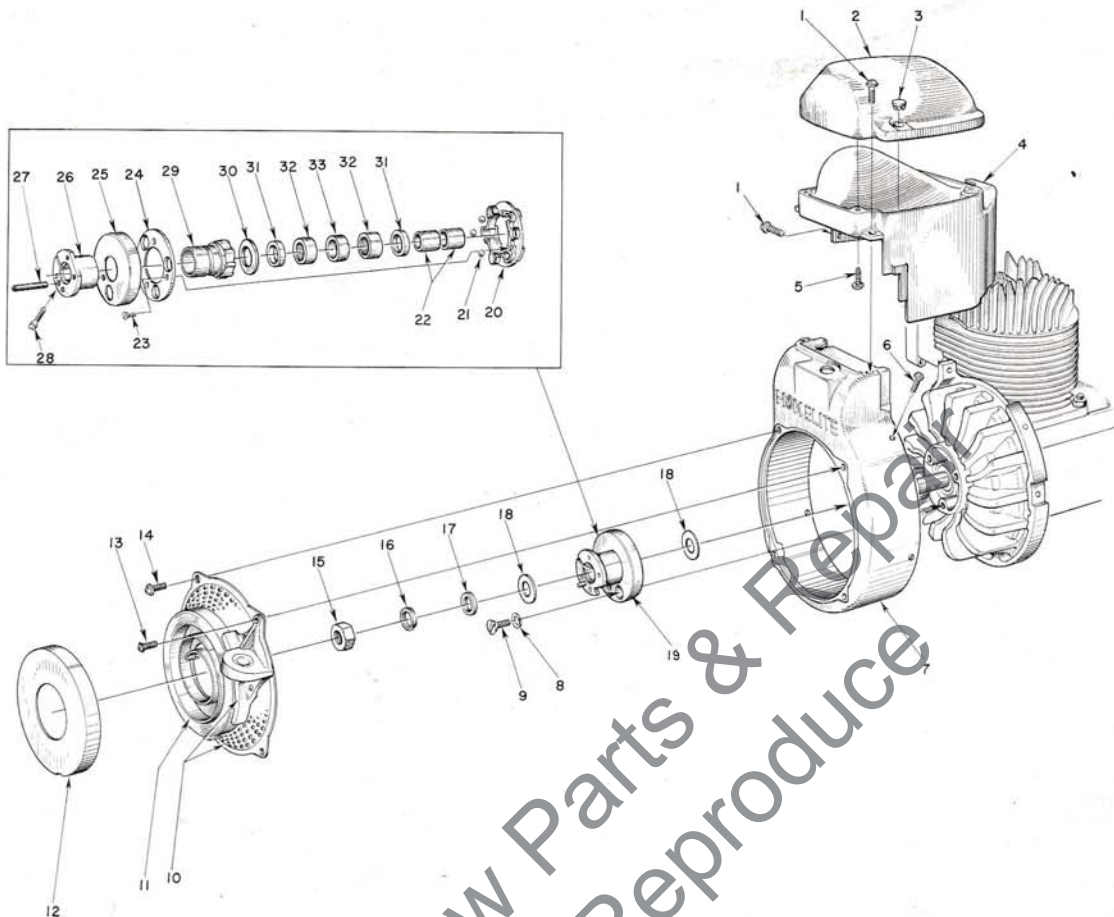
BALL DRIVE AND AIR SHROUD
